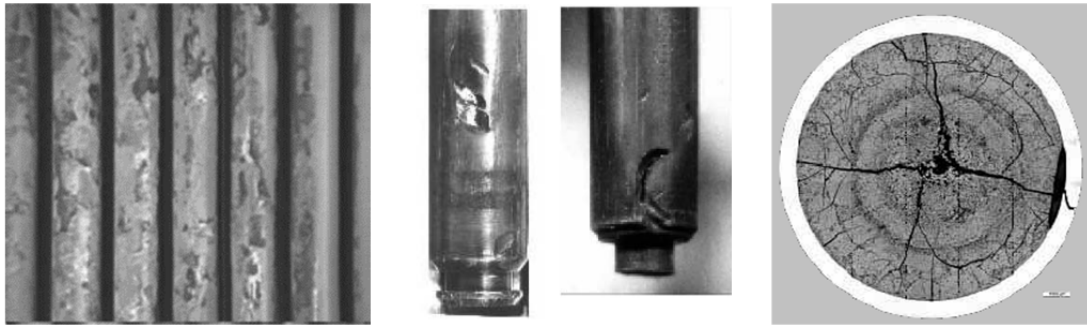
Failures examples - crud caused corrosion, debris fretting, PCI with SCC from [6]
